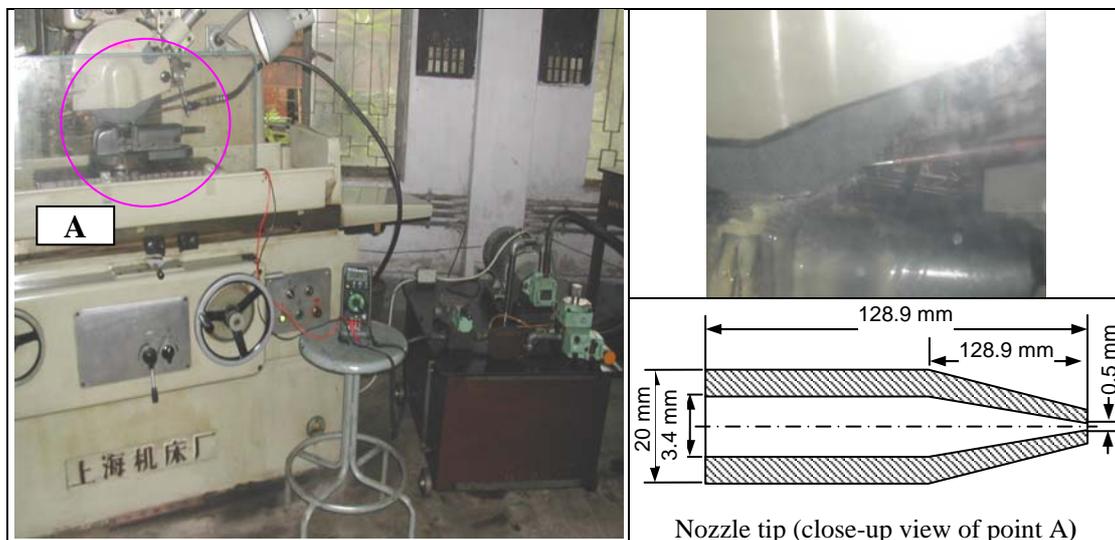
Photographic view of HPC jet delivery nozzle injecting cutting oil during grinding
